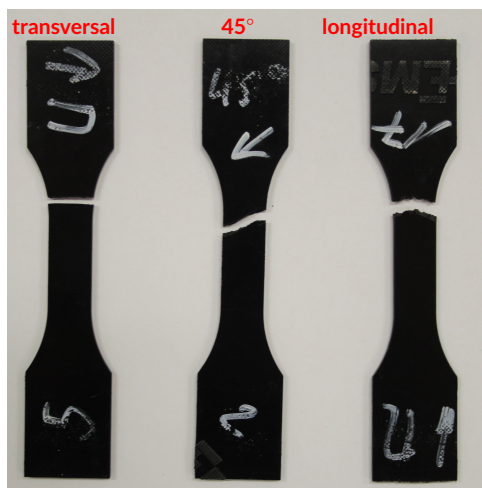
Fracture areas of the specimens (examples of specimens after cyclic testing)
